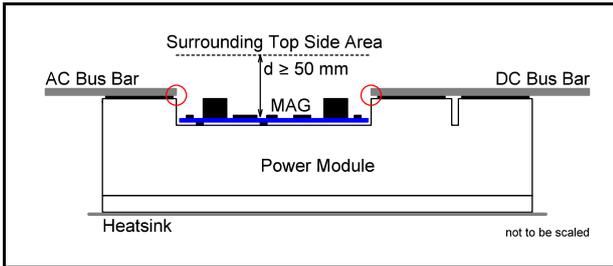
MAG Top Side Clearance Distance to Ensure Proper Cooling.
